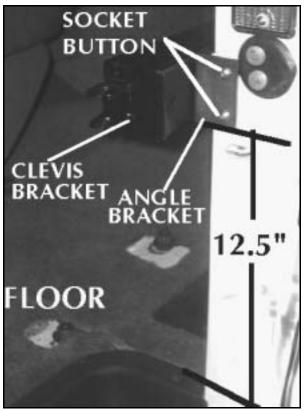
RIGHT CLEVIS BRACKET LOCATION
